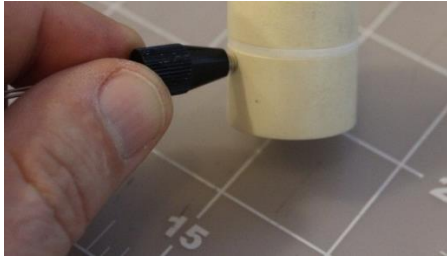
Tightening 6-40 fittings using the 6-40 finger-nut wrench
